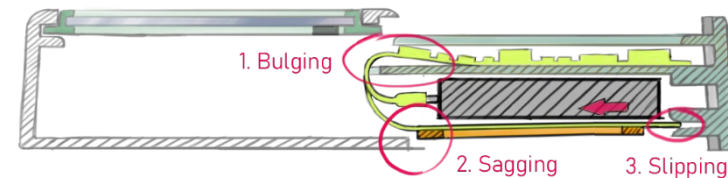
Section view of all component connected through integrated cable design and bulging PCBA
